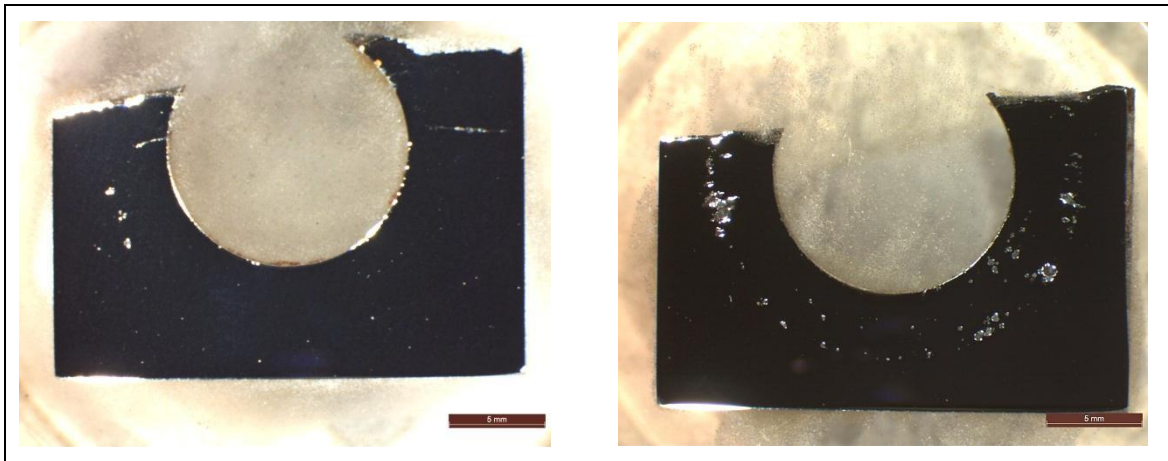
Batch 1 U-bend specimens mounted in resin and polished showing location of cracks and pitting around bolt hole. (Left) S430 specimen (Right) S450 specimen.
